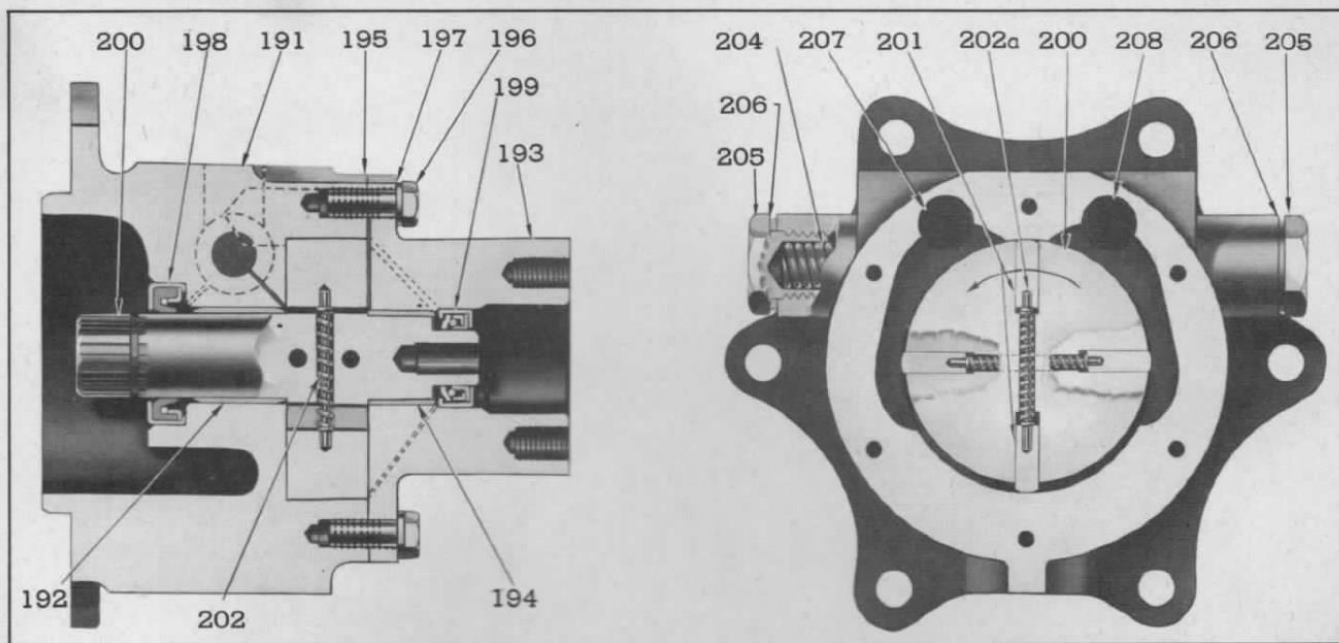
Oil Pump Assembly—Hydraulic Marine Reverse Gear
